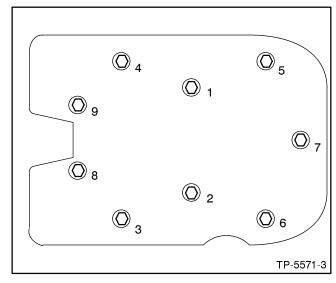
Cylinder Head Fastener Tightening Sequence
